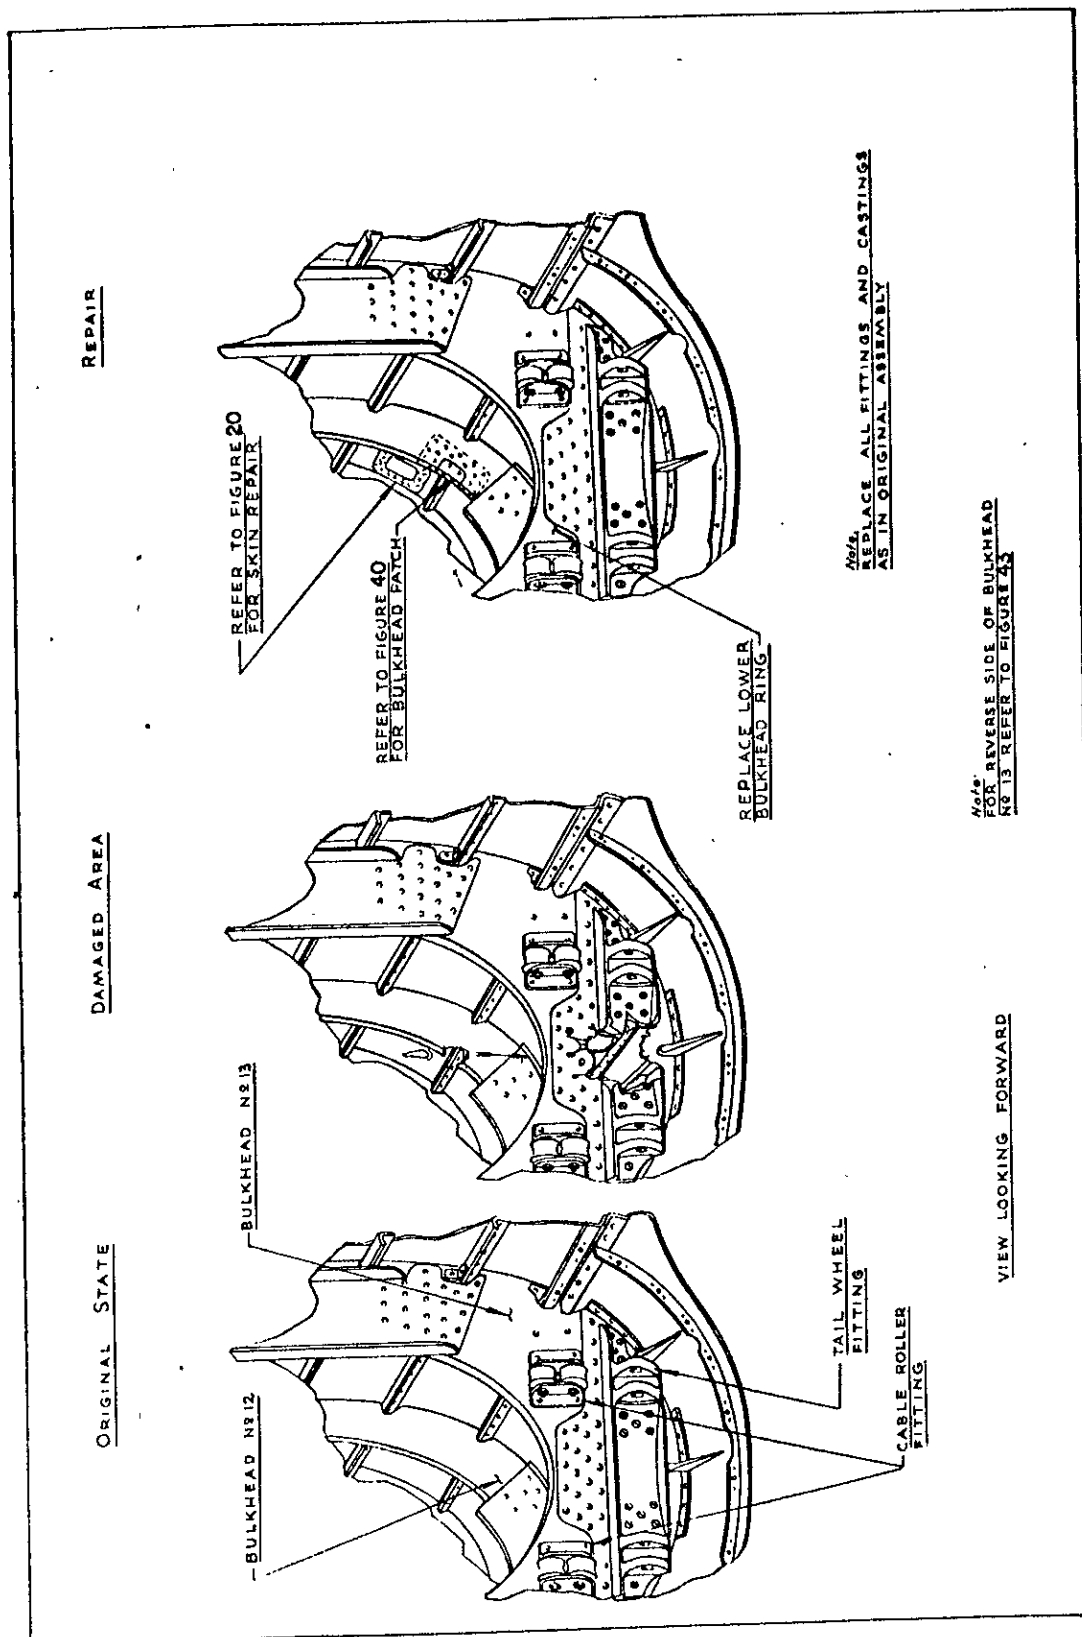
Fuselage - Bulkhead and Tail Wheel Fitting
